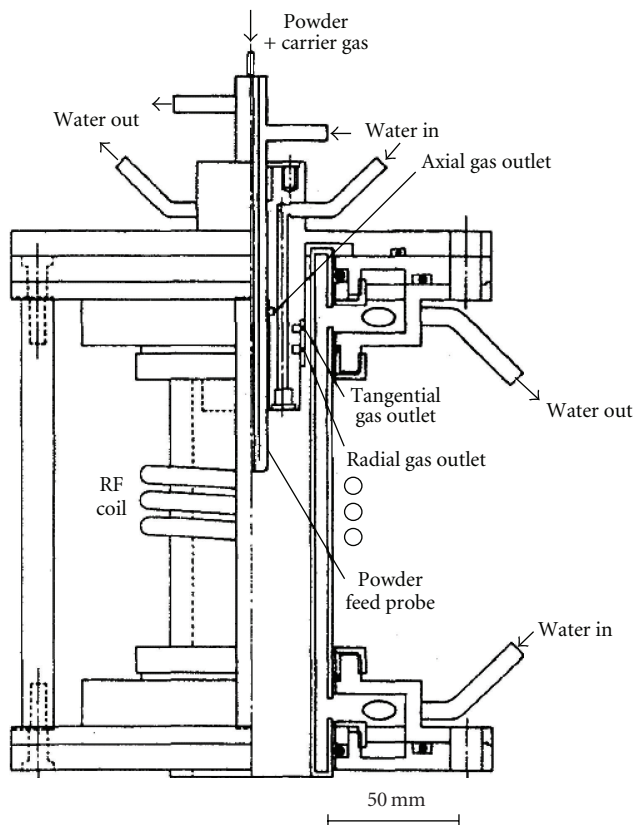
Cross-sectional view of ICP spray coating equipment [2].
